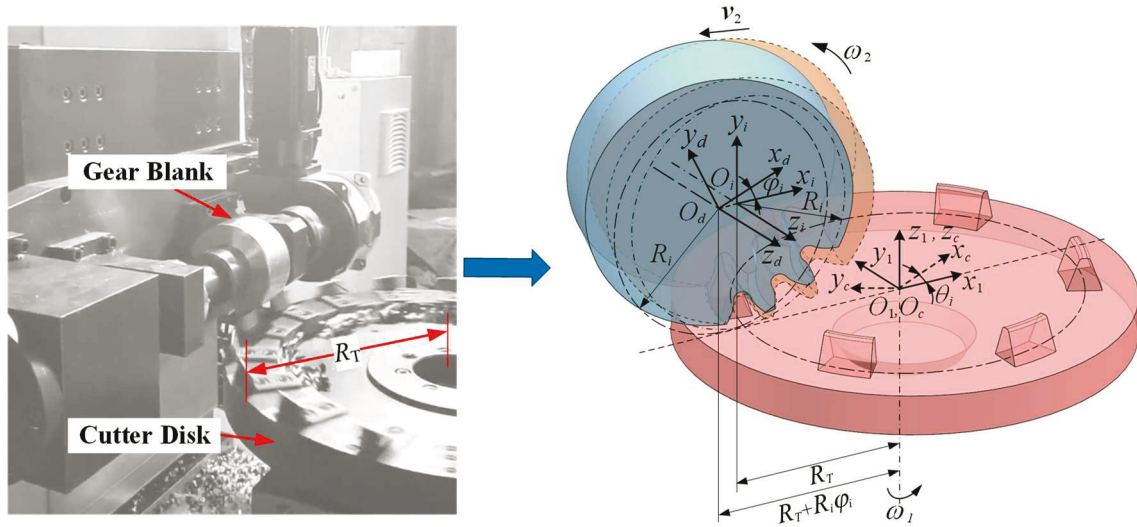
VH-CATT cylindrical gear machining coordinate system
